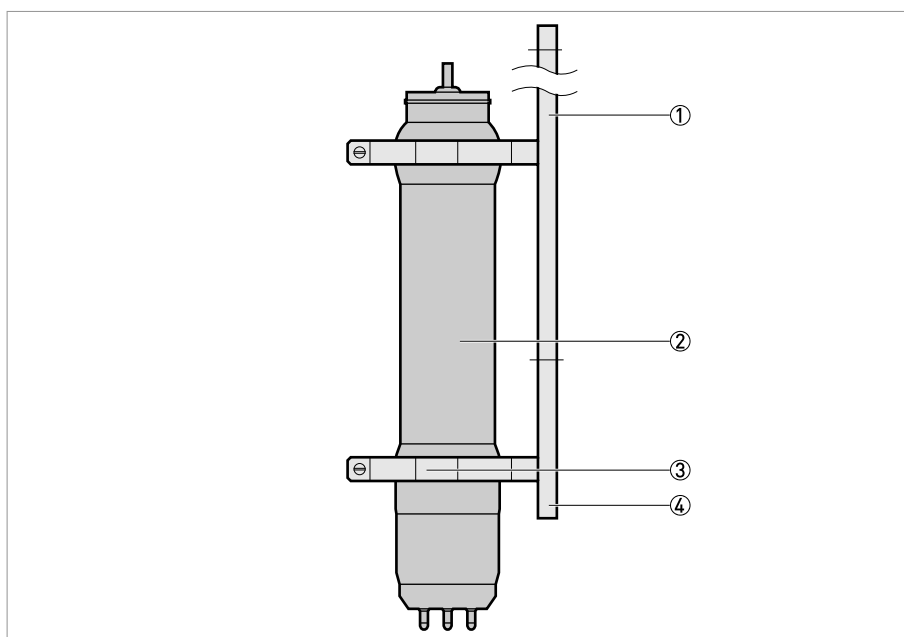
Mounting to MAA 2000 slide rail immersion holder
